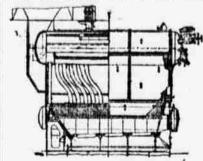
LONGITUDINAL ELEVATION, PARTLY IN SECTION.
